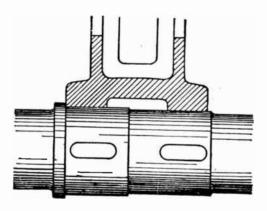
Hub and shaft design on large machines to reduce the machine work and facilitate erecting.
